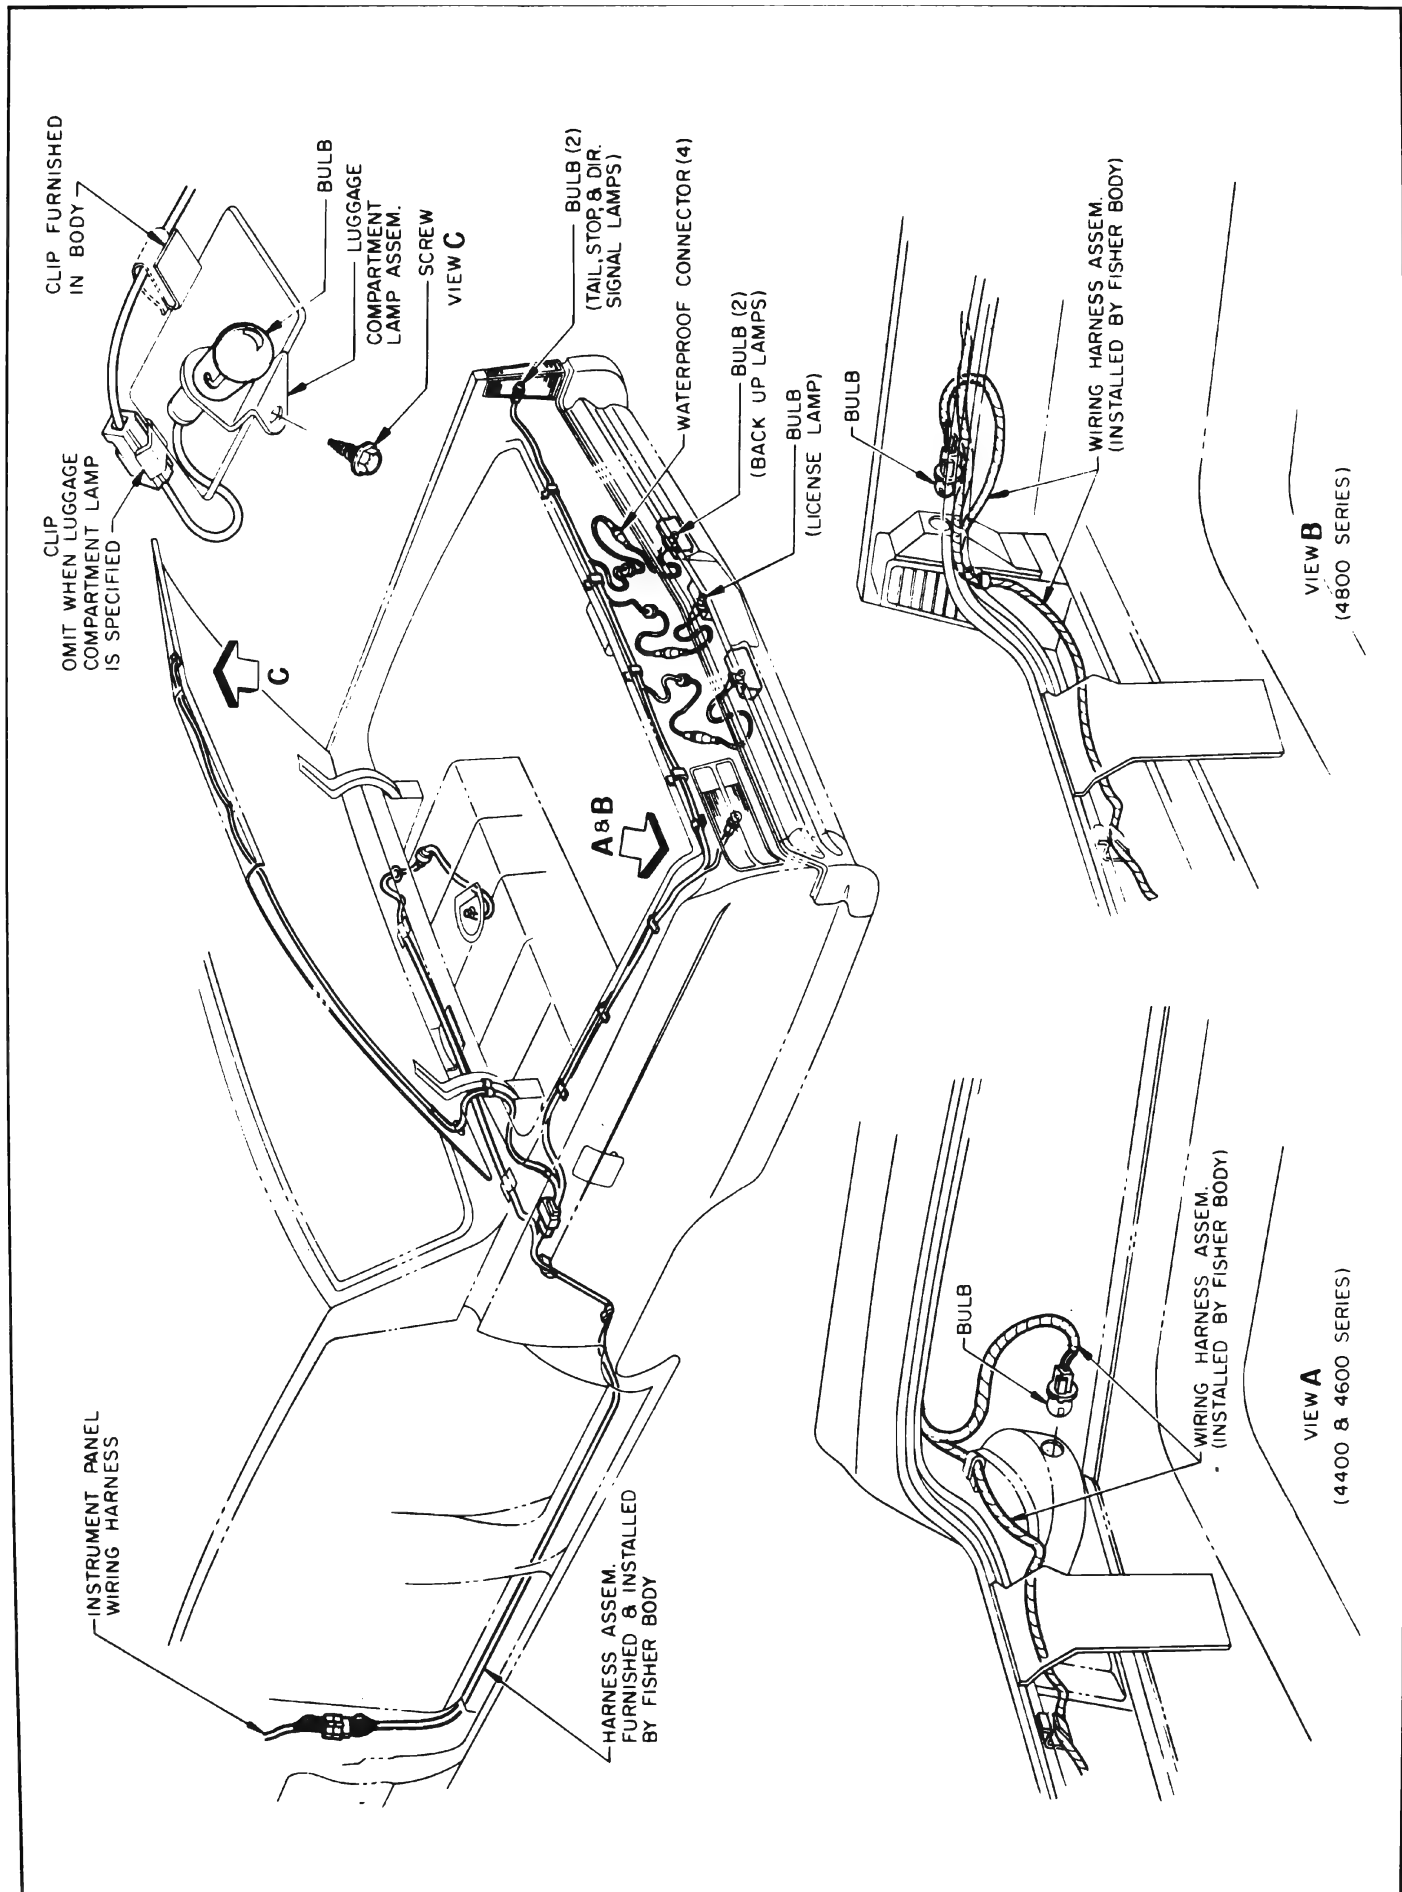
Rear Lamps and Fuel Gauge Wiring
